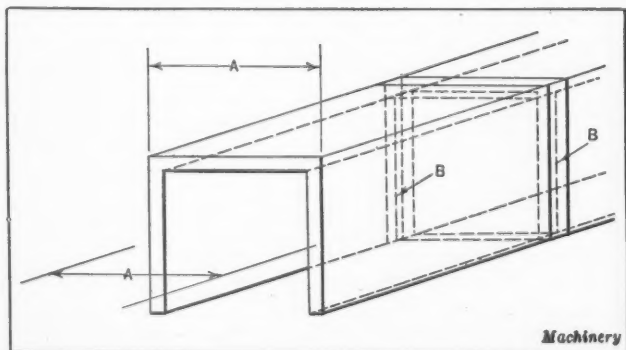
Box-like Casting with Open Side and Internal Ribs which prevent Uniform Shrinkage
